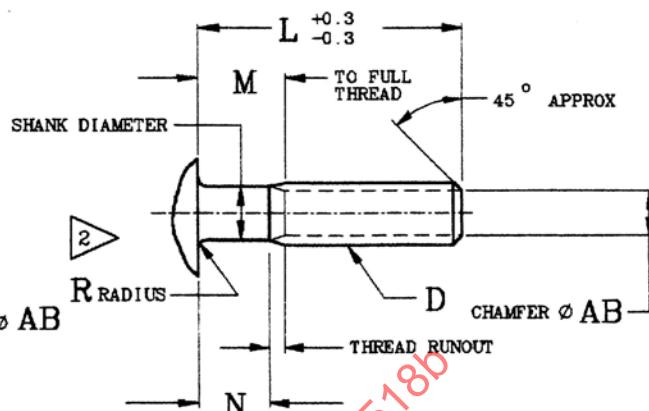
B - COARSE TOLERANCE-PITCH DIAMETER SHANK
